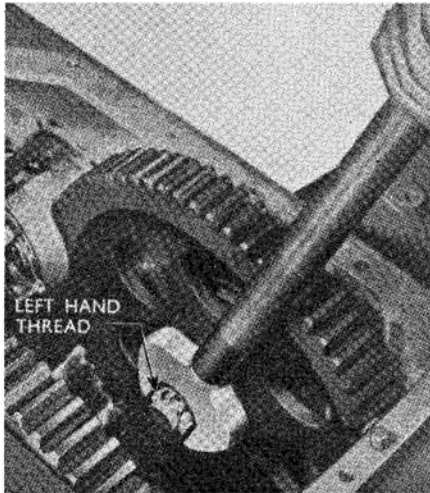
Removing nut from inner end of rear axle. Note that both rear axles and bull gear retaining nuts have left hand threads. Axle shaft bearing preload is adjusted by nut; refer to paragraph 207.
